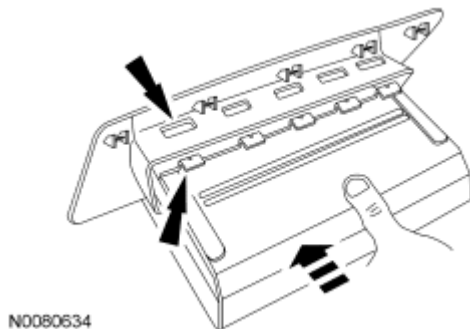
Pushing Top Of Passenger Air Bag Cover To Engage Top Canister Hooks
